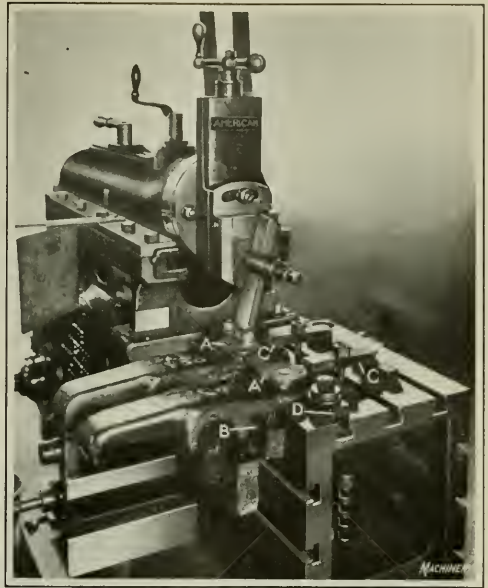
Shaper equipped for planing the Faces of Bosses on Screw Supports for Engine Lathes
